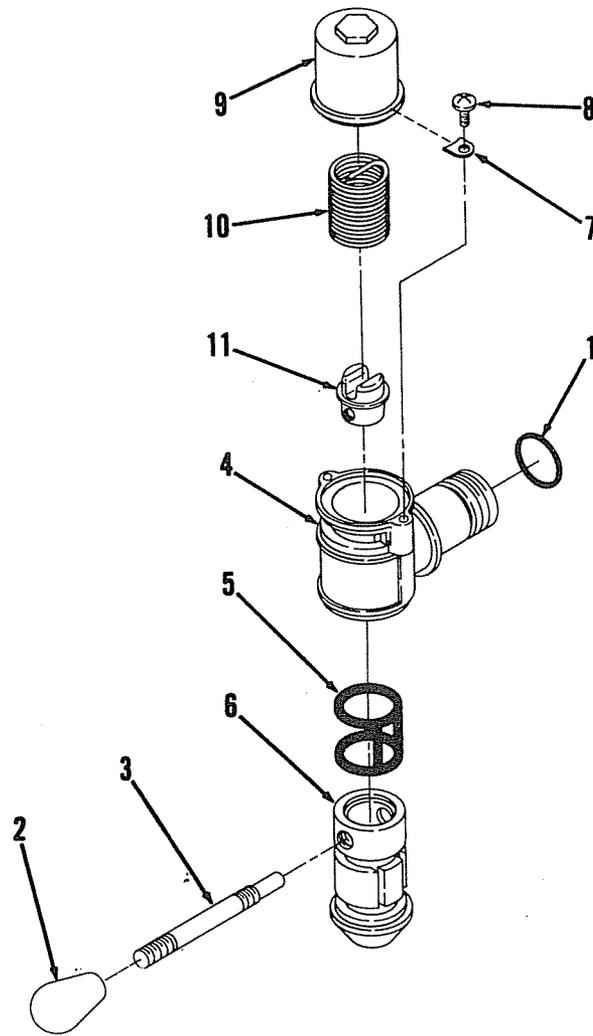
DISPENSING VALVE ASSEMBLY
